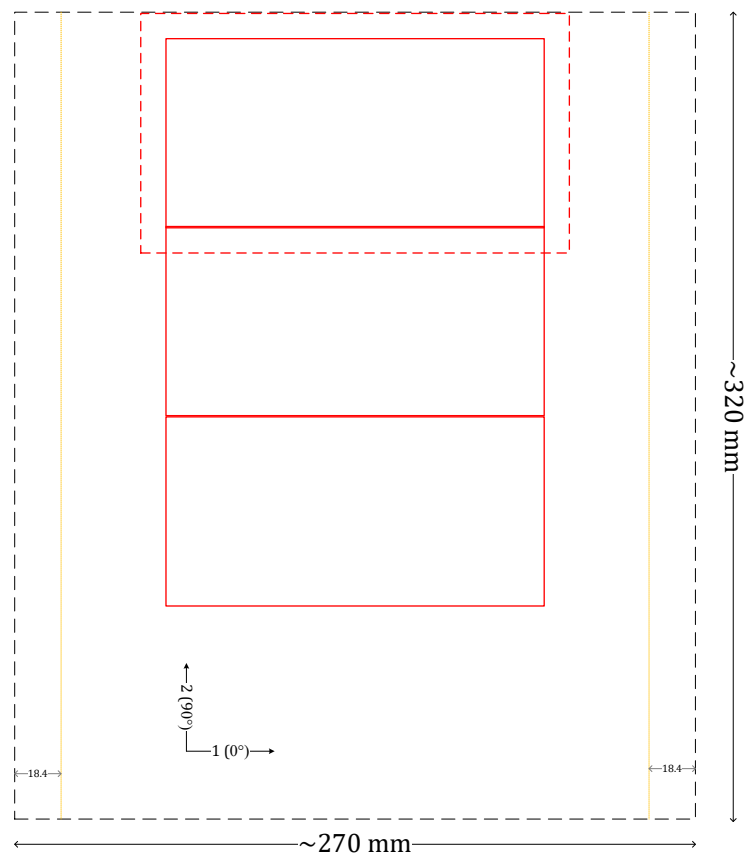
Three former IBSS coupons (red) to be cut from a side of a box
